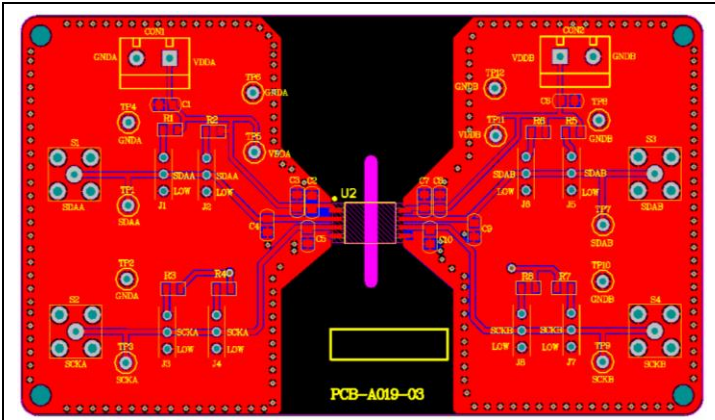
The CA-IS3020G EVM PCB Layout_ Top
